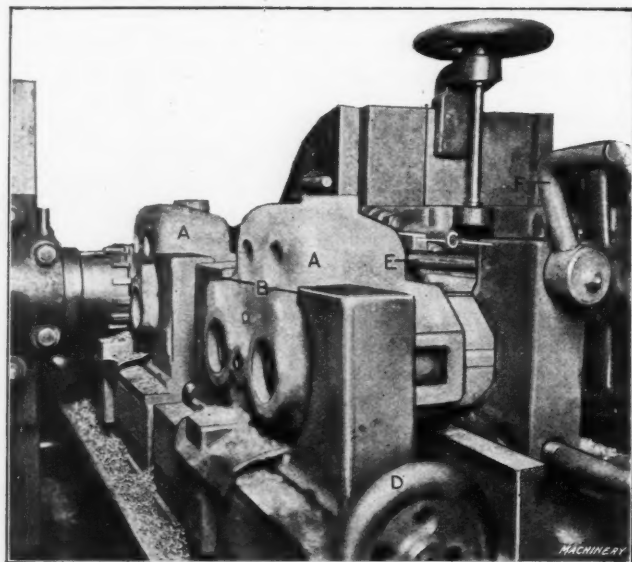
Milling the Top and Bottom Surfaces of the Cylinder Casting
